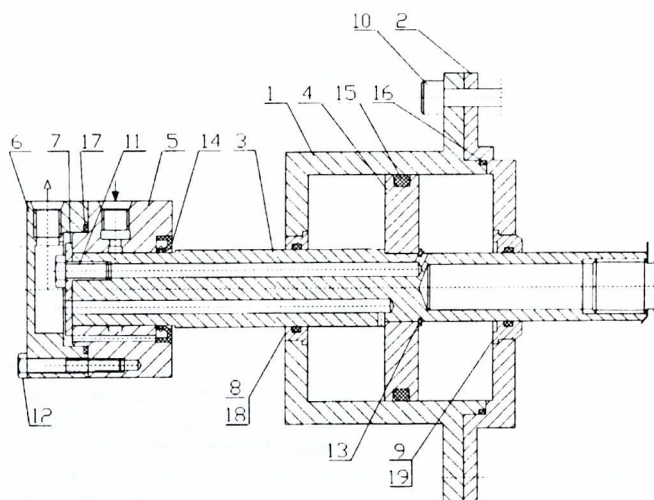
Hydraulic load-setting assembly of the propeller pitch control mechanism
